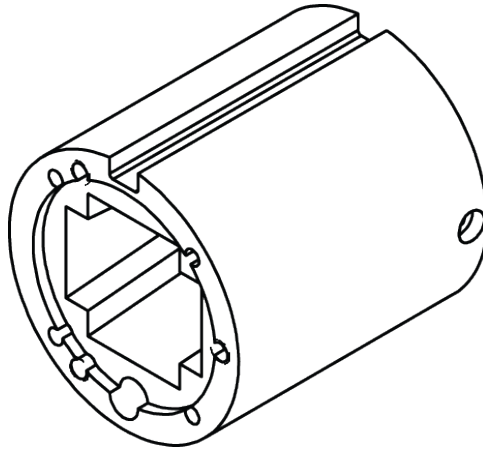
Drawing of the CB holder. The holder is a 3D printed solid, designed in AutoCAD.
